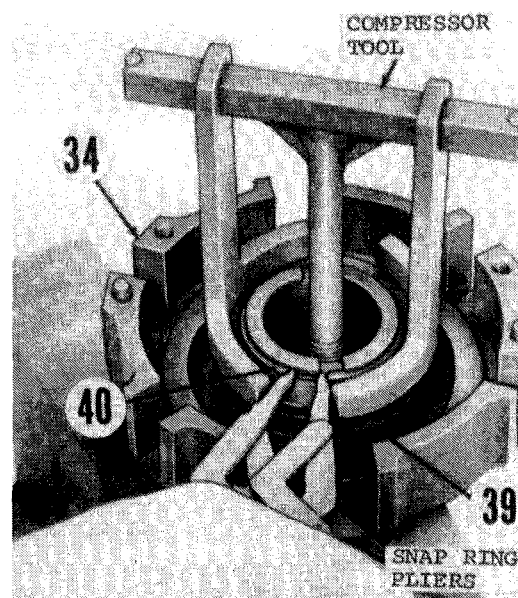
Compress spring washers (39) with JDT-24A tool or other suitable tool to remove snap ring (40).
